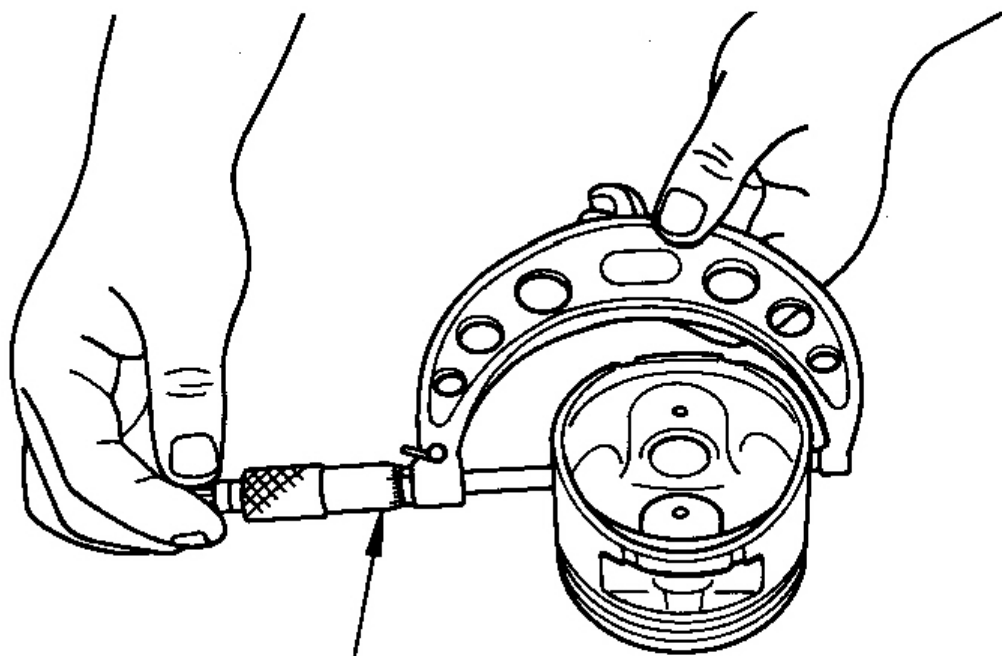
Checking Clearance Of Piston-To-Cylinder Bore By Using Bore Gauge
